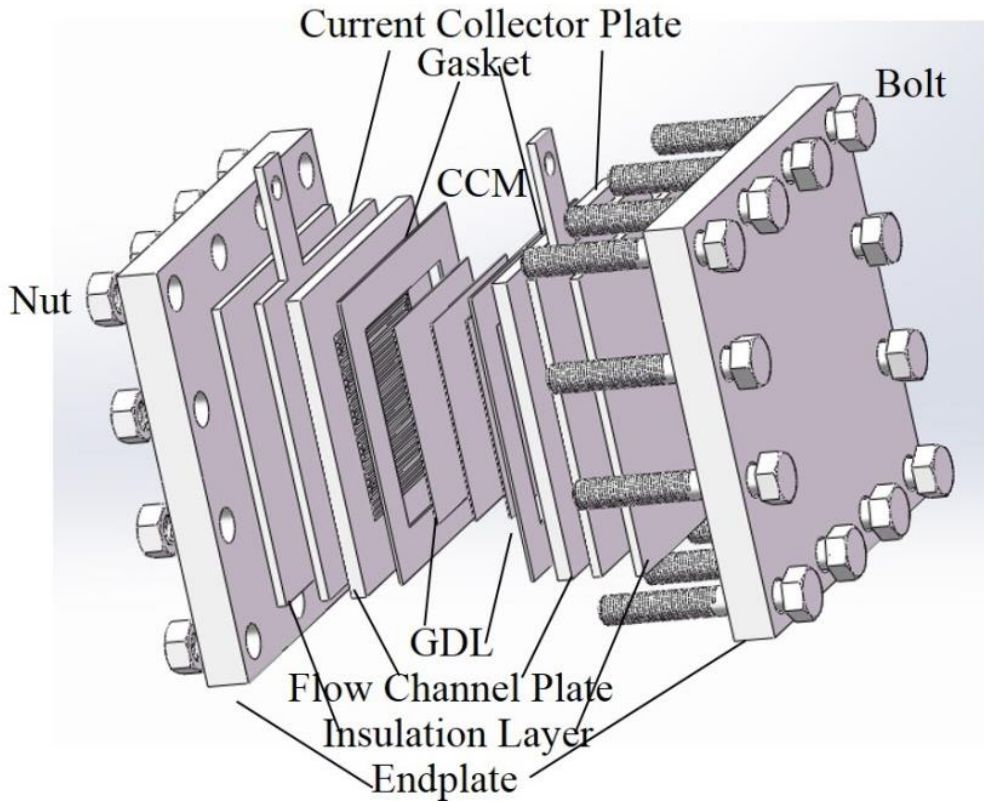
A schematic drawing of a single fuel cell assembly used in the durability testing
